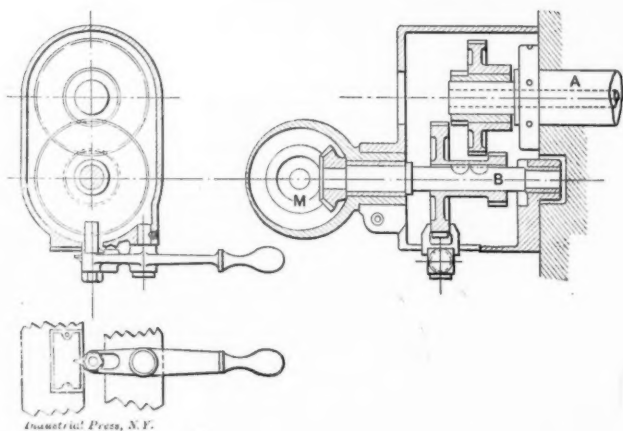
SECTIONAL VIEWS OF UPPER TWO-SPEED MECHANISM.
